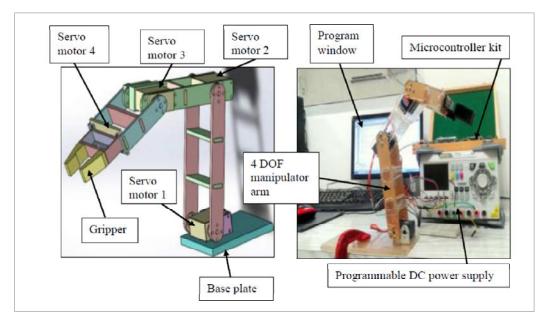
(a) Assembly Design of 4 DOF Manipulator Arm (b) Motion Testing using Microcontroller of 4 DOF Manipulator Arm
